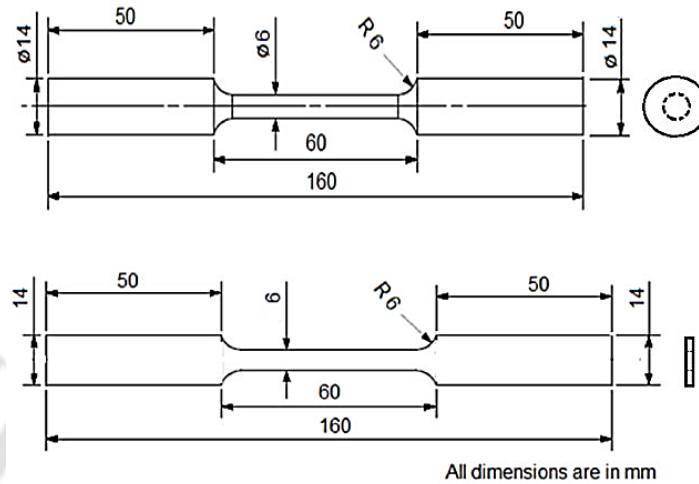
Schematic drawing of the flat and cylindrical tensile specimens [114]
